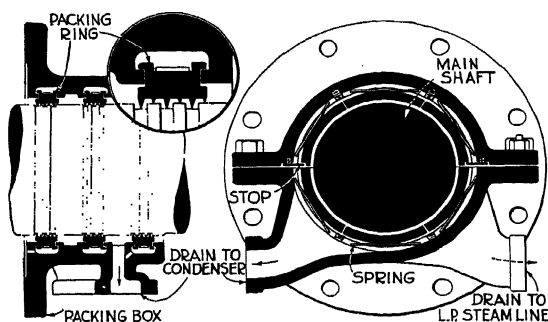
Low-pressure labyrinth packing gland. (Courtesy Socony-Vacuum Oil Co.)
